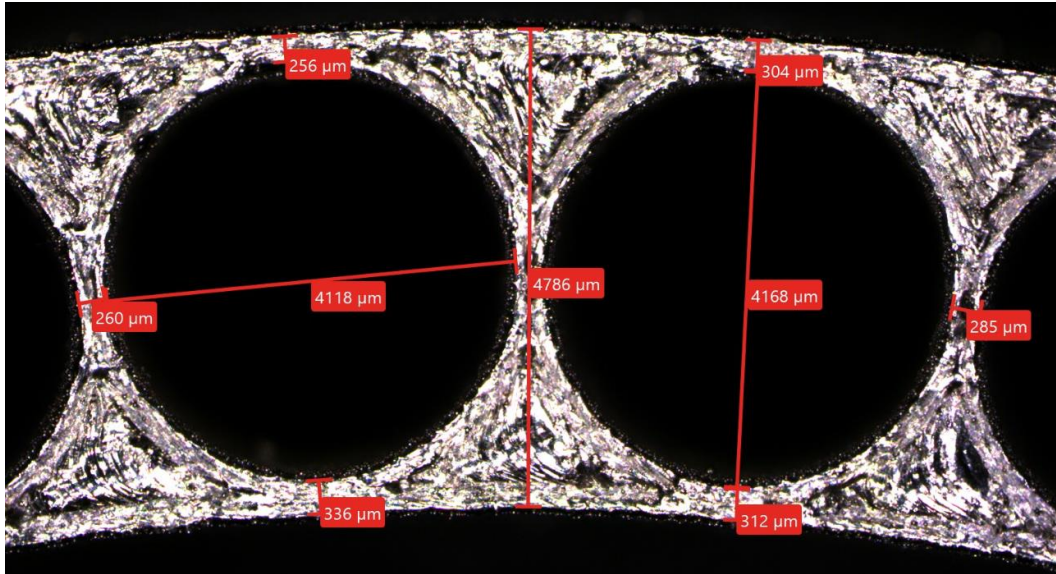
Optical microscopy of single array with 4mm diameter holes.
